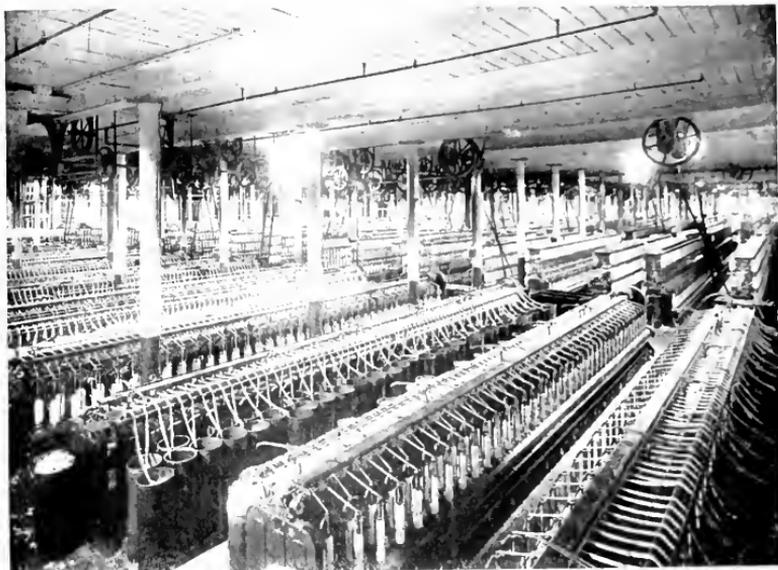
Slubbers and Roving Frames Well Illuminated by a General Lighting System. 500 watt Mazda C lamps in dome shaped enameled steel reflectors are placed close to the 18 ft. ceiling on centers 24 by 33 ft. One can work efficiently in any part of the room.
